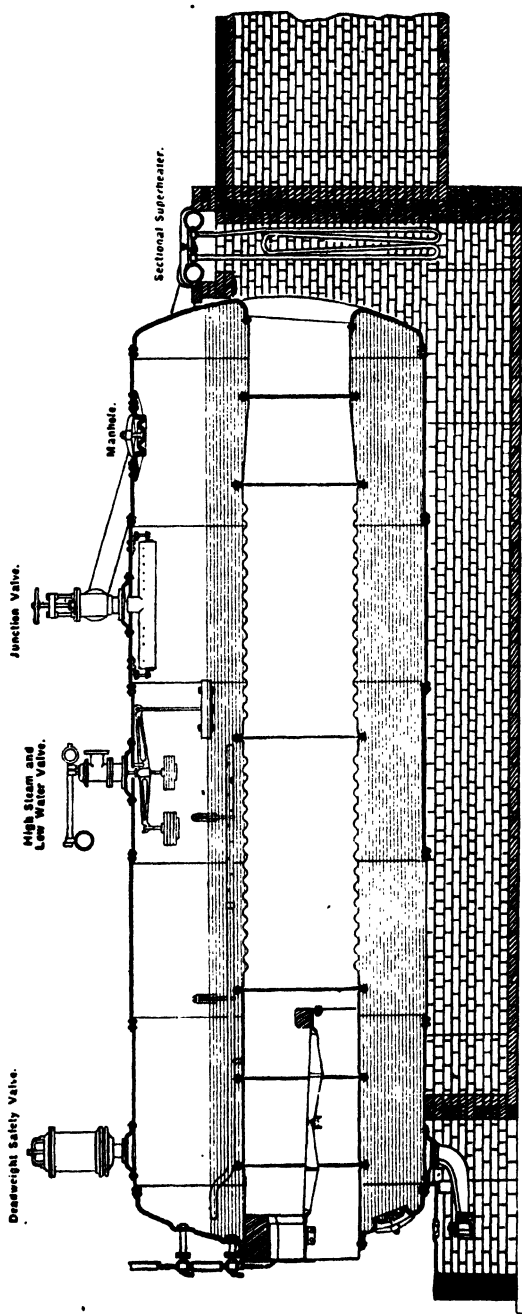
DISH END LANCASHIRE BOILER WITH CORRUGATED FLUE TUBES
